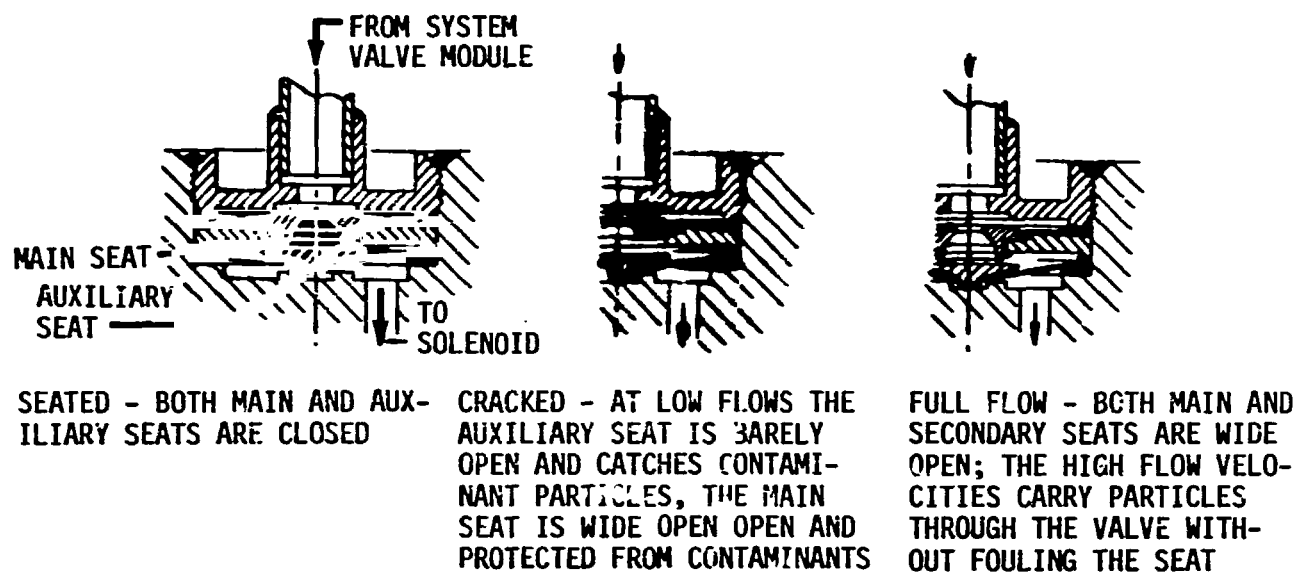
FUEL CELL MODULE CHECK VALVE
